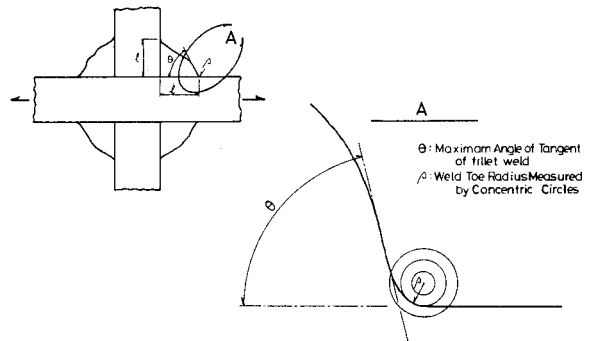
Measurement of fillet weld toe angle and toe radius.
